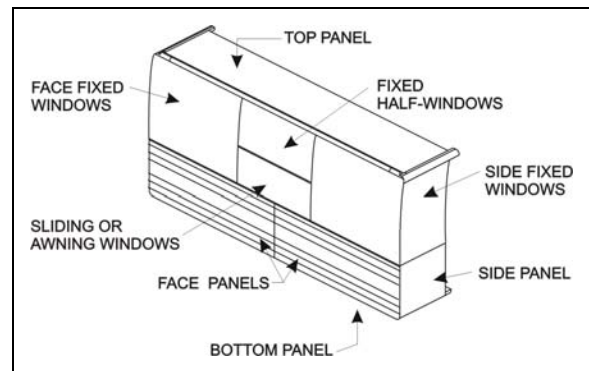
SLIDE-OUT PANELS AND WINDOWS
